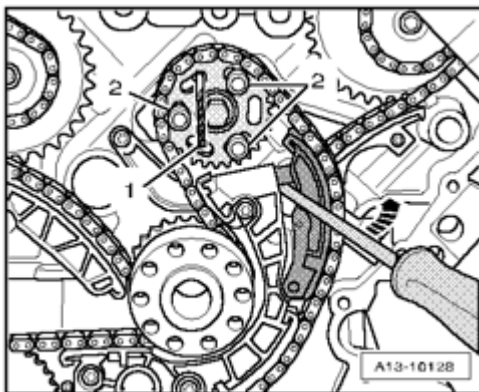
Mounting Chain Tensioner With Chain And Balance Shaft Sprocket
